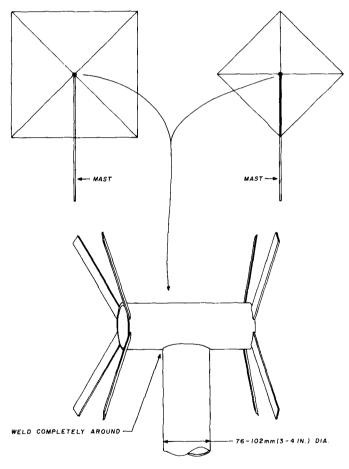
Method of welding spider-to-mast section to obtain a square or diamond-shaped quad.
